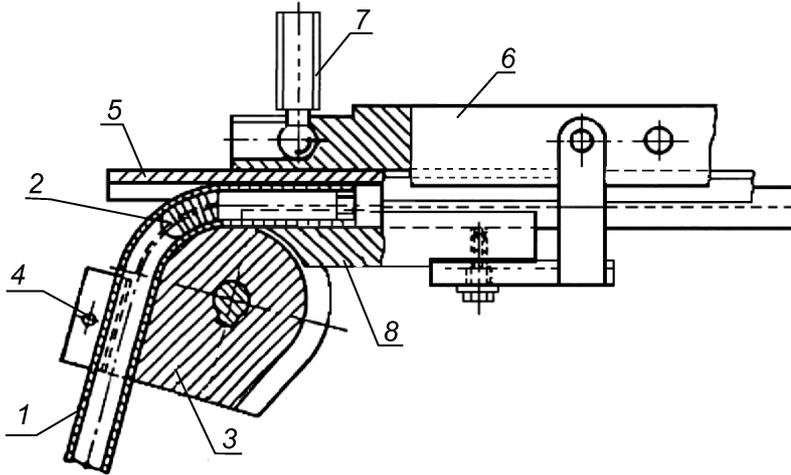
Scheme of a tube bending machine with a rotating template and a flexure mandrel. 1 – bent tube, 2 – flexible segment mandrel, 3 – rotating template, 4 – clamping jaws, 5 – clamping strip, 6 – guide, 7 – screw for regulation of clamping force of the strip and the planisher, 8 – planisher.
